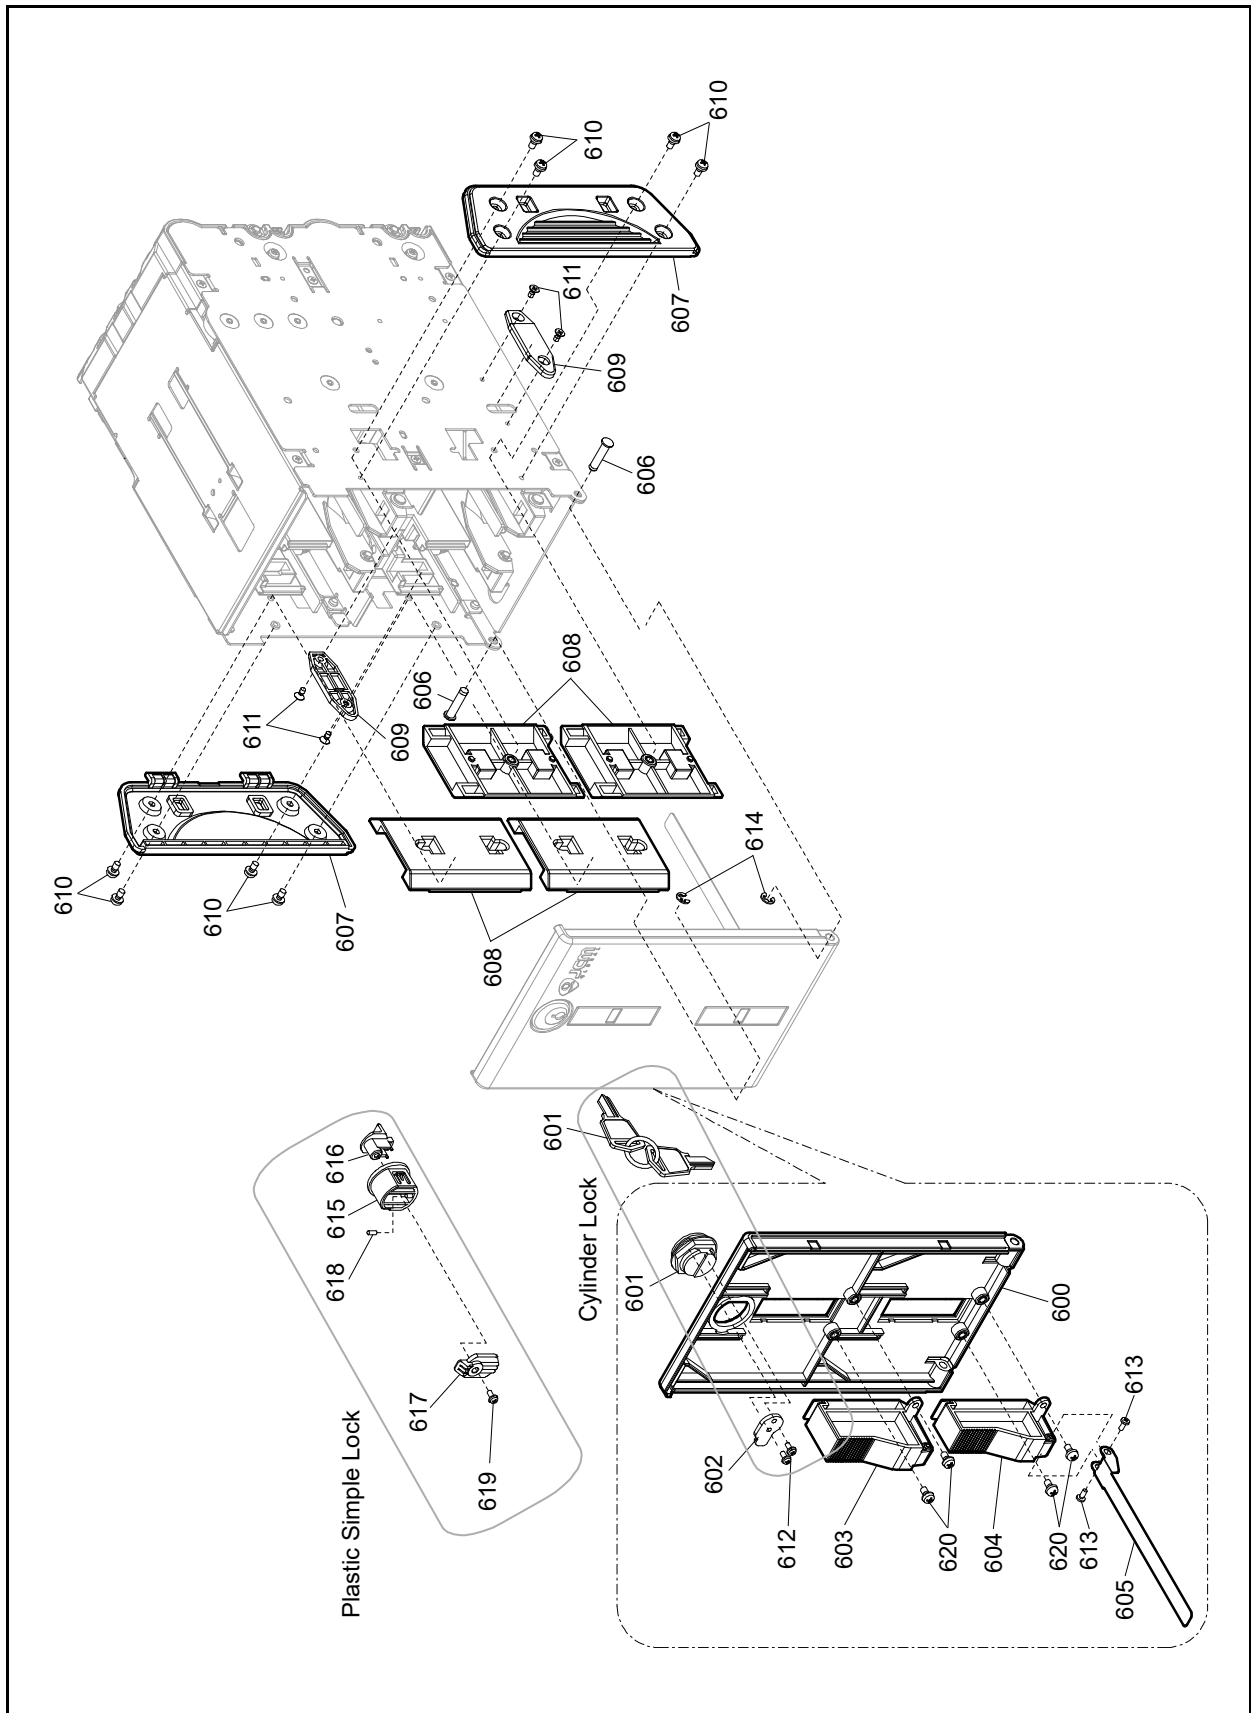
iPRO-RC Recycler Unit 1 Exploded View
